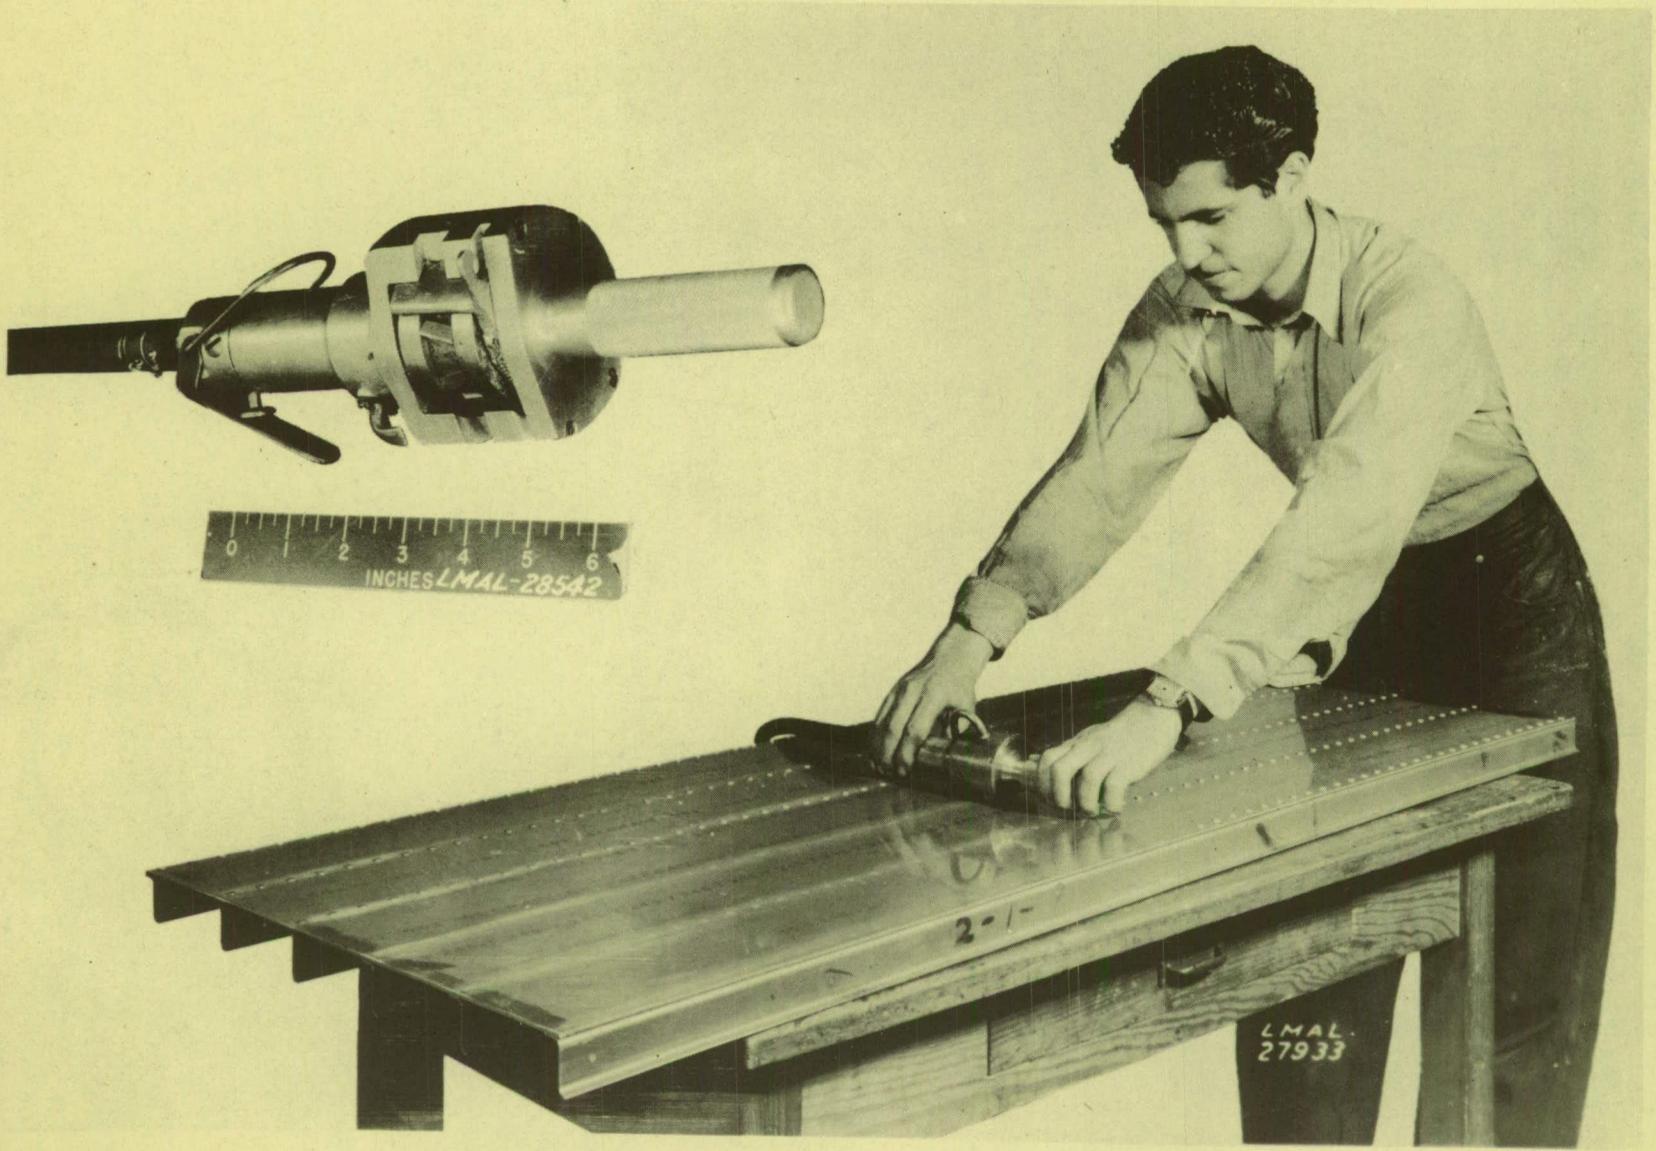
Flush-rivet milling tool for removing the protruding portion of the rivet head.
